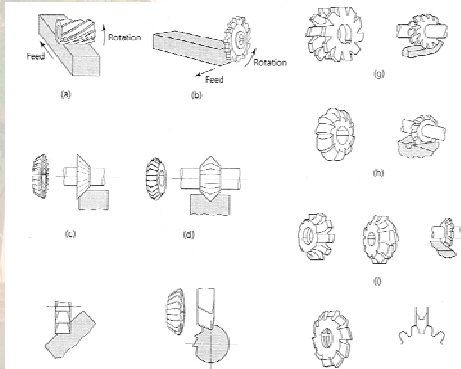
Common HSS milling cutters: (a) staggered-tooth cutter, (b) side milling cutter, (c) plain milling cutter, (d) single-angle milling cutter, (e) double-angle milling cutter, (f) convex milling cutter, (g) concave milling cutter, (h) corner rounded milling cutter.
